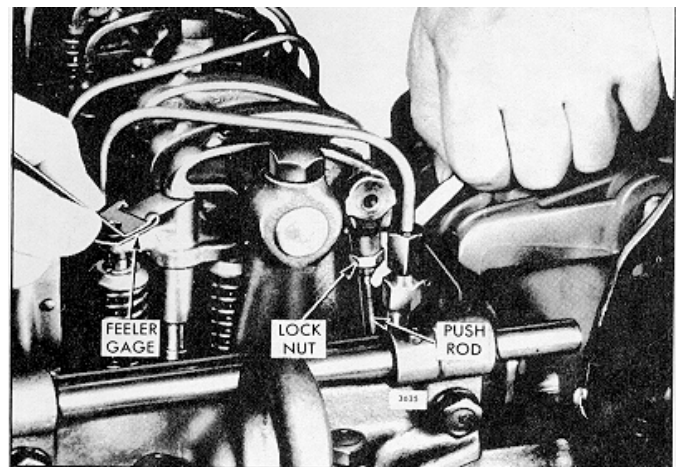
Adjusting Valve Clearance (Unloaded Valve Bridge)
